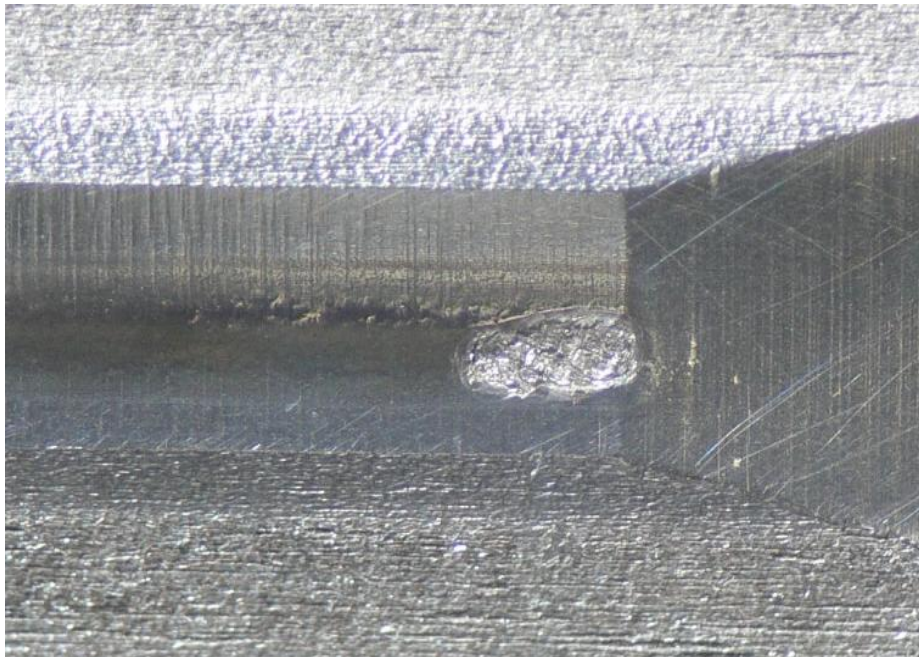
Flaking of outer sleeve raceway surface without processing (edge)
